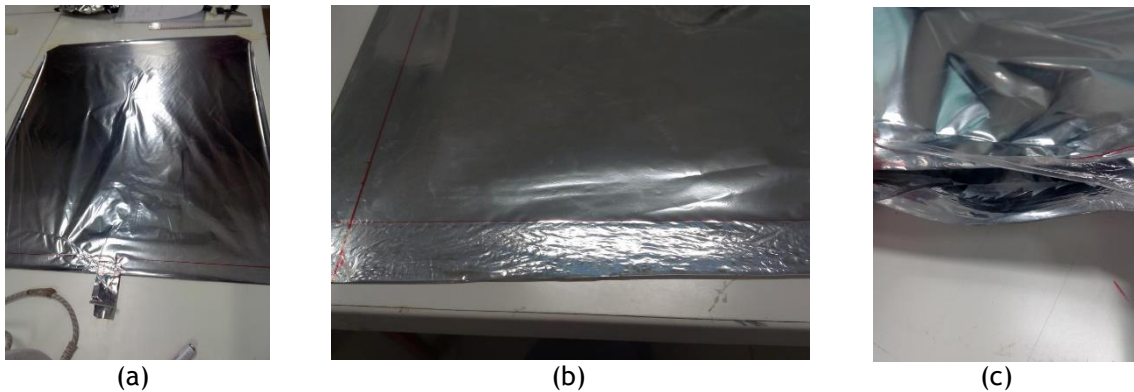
Manufacture test with LDPE/PET-MET/LDPE. (a)Preparation of the material; (b)Welded joints; (c) Welded point that opened
